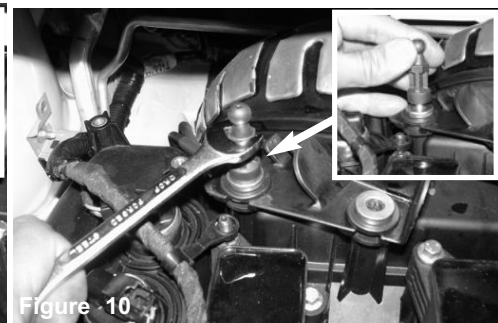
Now loosen the engine cover fitting using 12mm wrench. Remove and save fitting and grommet with spacer for later install.
